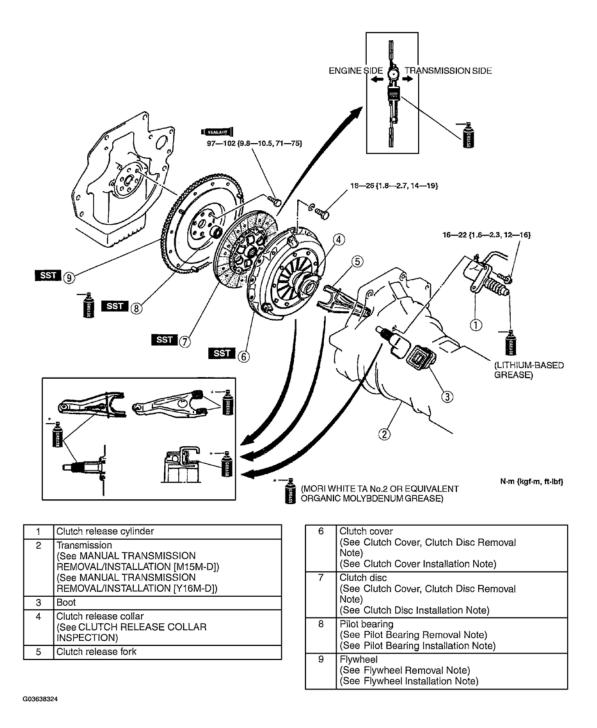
Removing Clutch Unit Courtesy of MAZDA MOTORS CORP.
